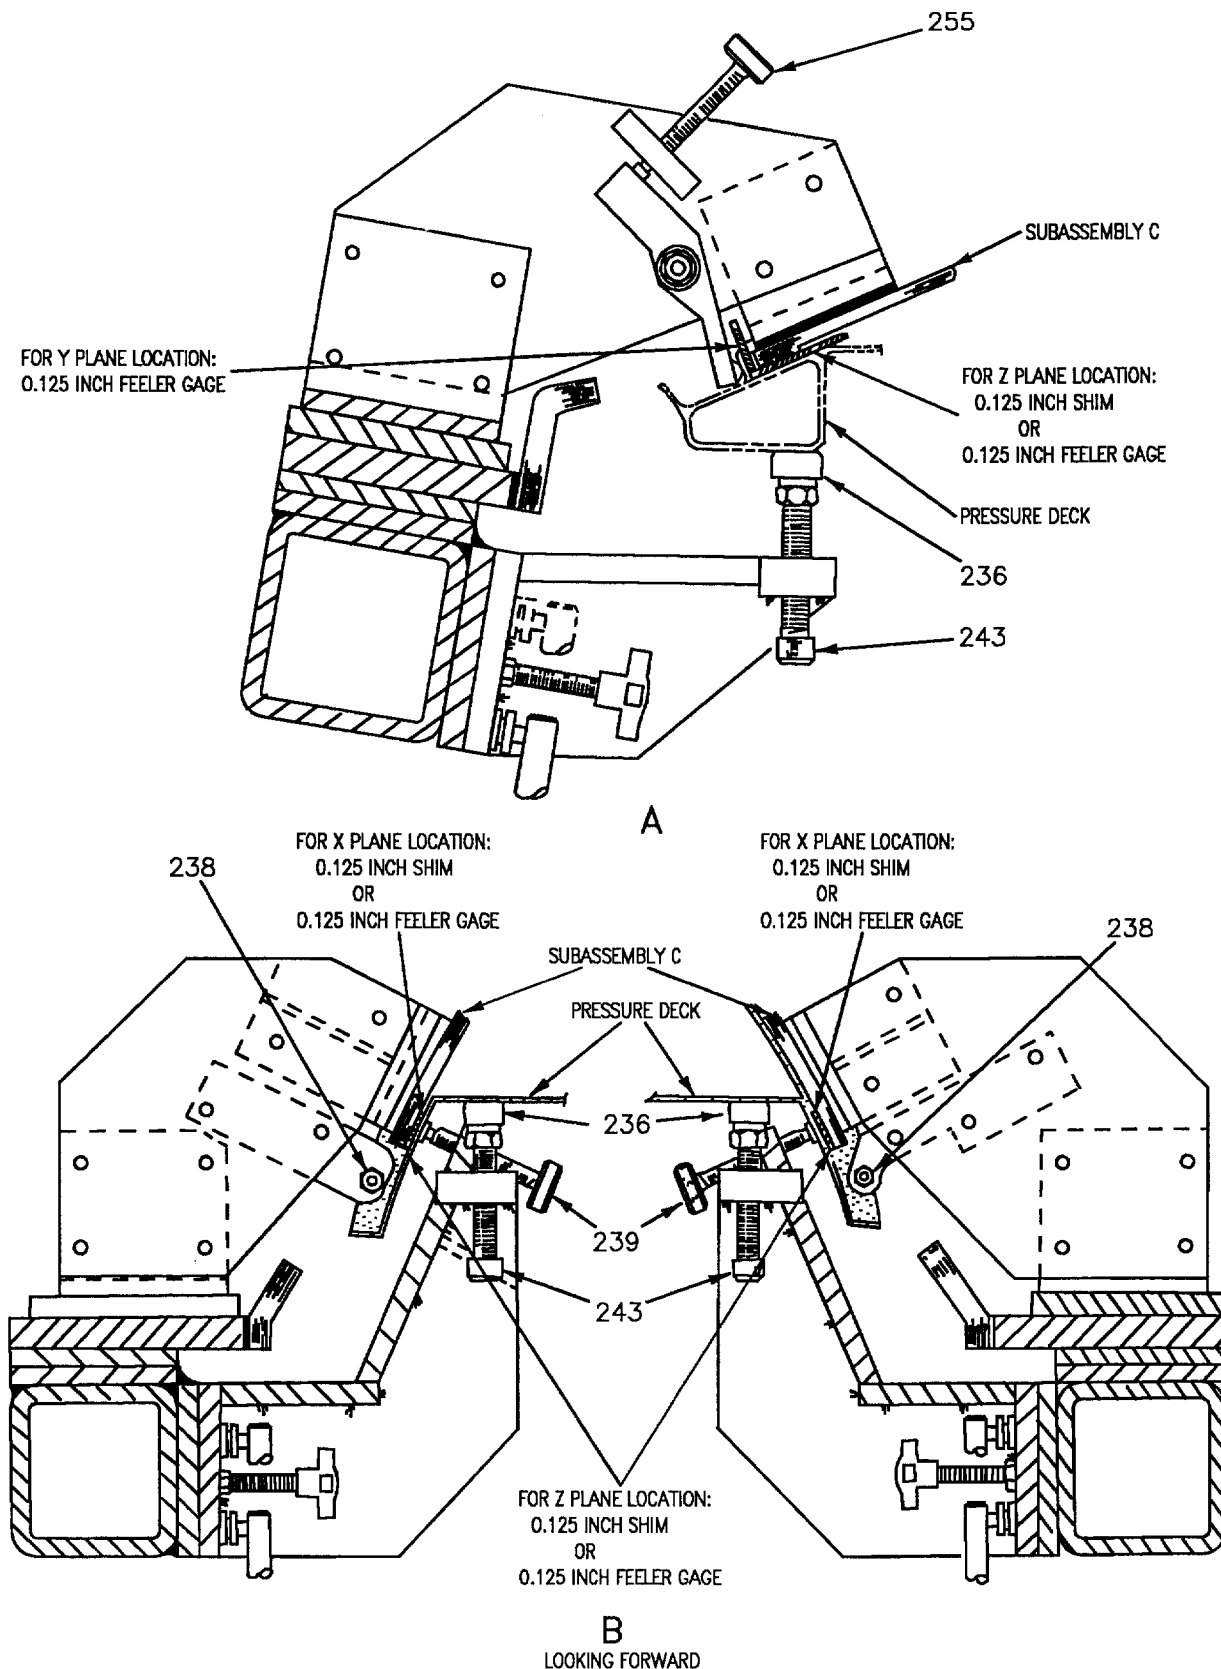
Inspection or Replacement - Pressure Deck (Sheet 2)
